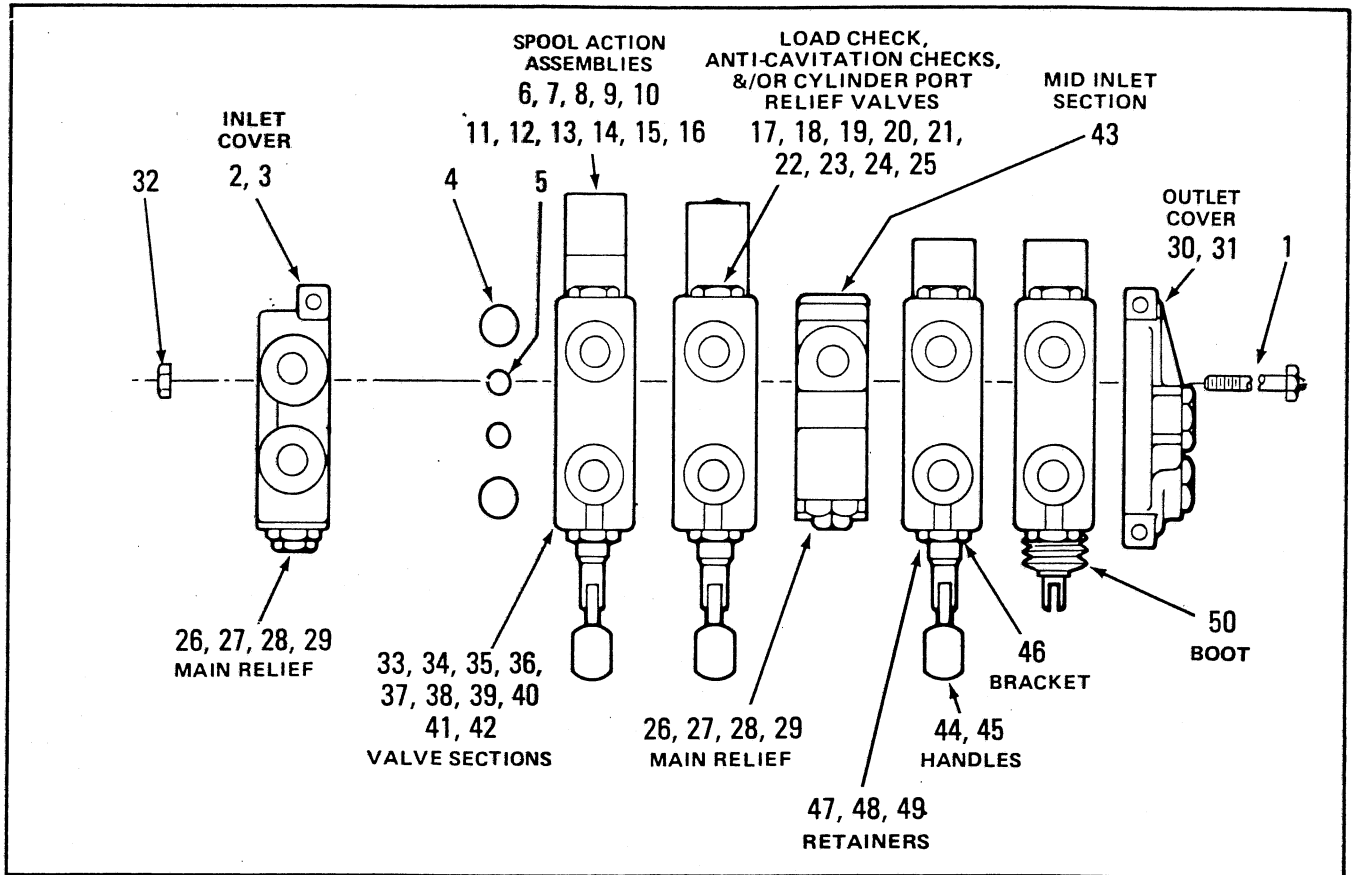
Model V20 Directional Control Valve, Typical Main Assembly.
